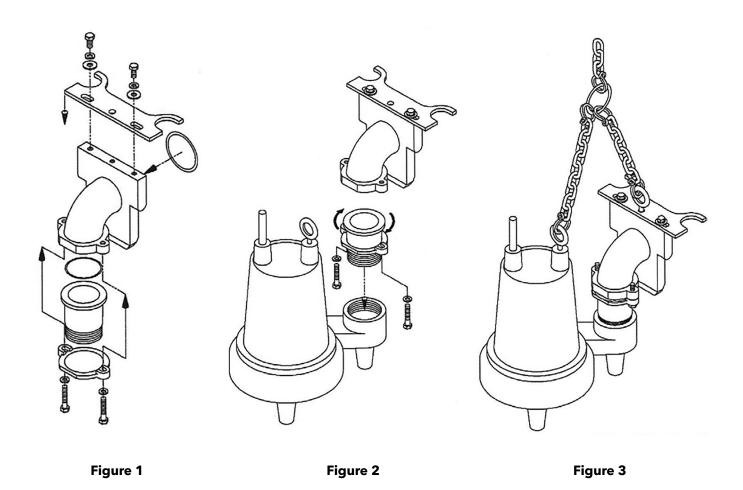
shows all the parts included with the pullout flange assembly. This is the removable portion of the base elbow rail system assembly, and it is this assembly that will attach to the discharge of the pump (see figure 2). The threaded pump adapter flange will thread into the pump discharge as shown. The pump adapter flange is secured by tightening the two (2) long cap screws provided. This allows the pump to be oriented as necessary before lowering into the basin or collection tank. After attaching the pull out flange assembly to the pump, the lifting chain or cable assembly should be attached (see figure 3). This should be adequately sized to handle the weight of the pump and the pull out flange assembly as well as be long enough to allow for easy access for pulling the pump.
